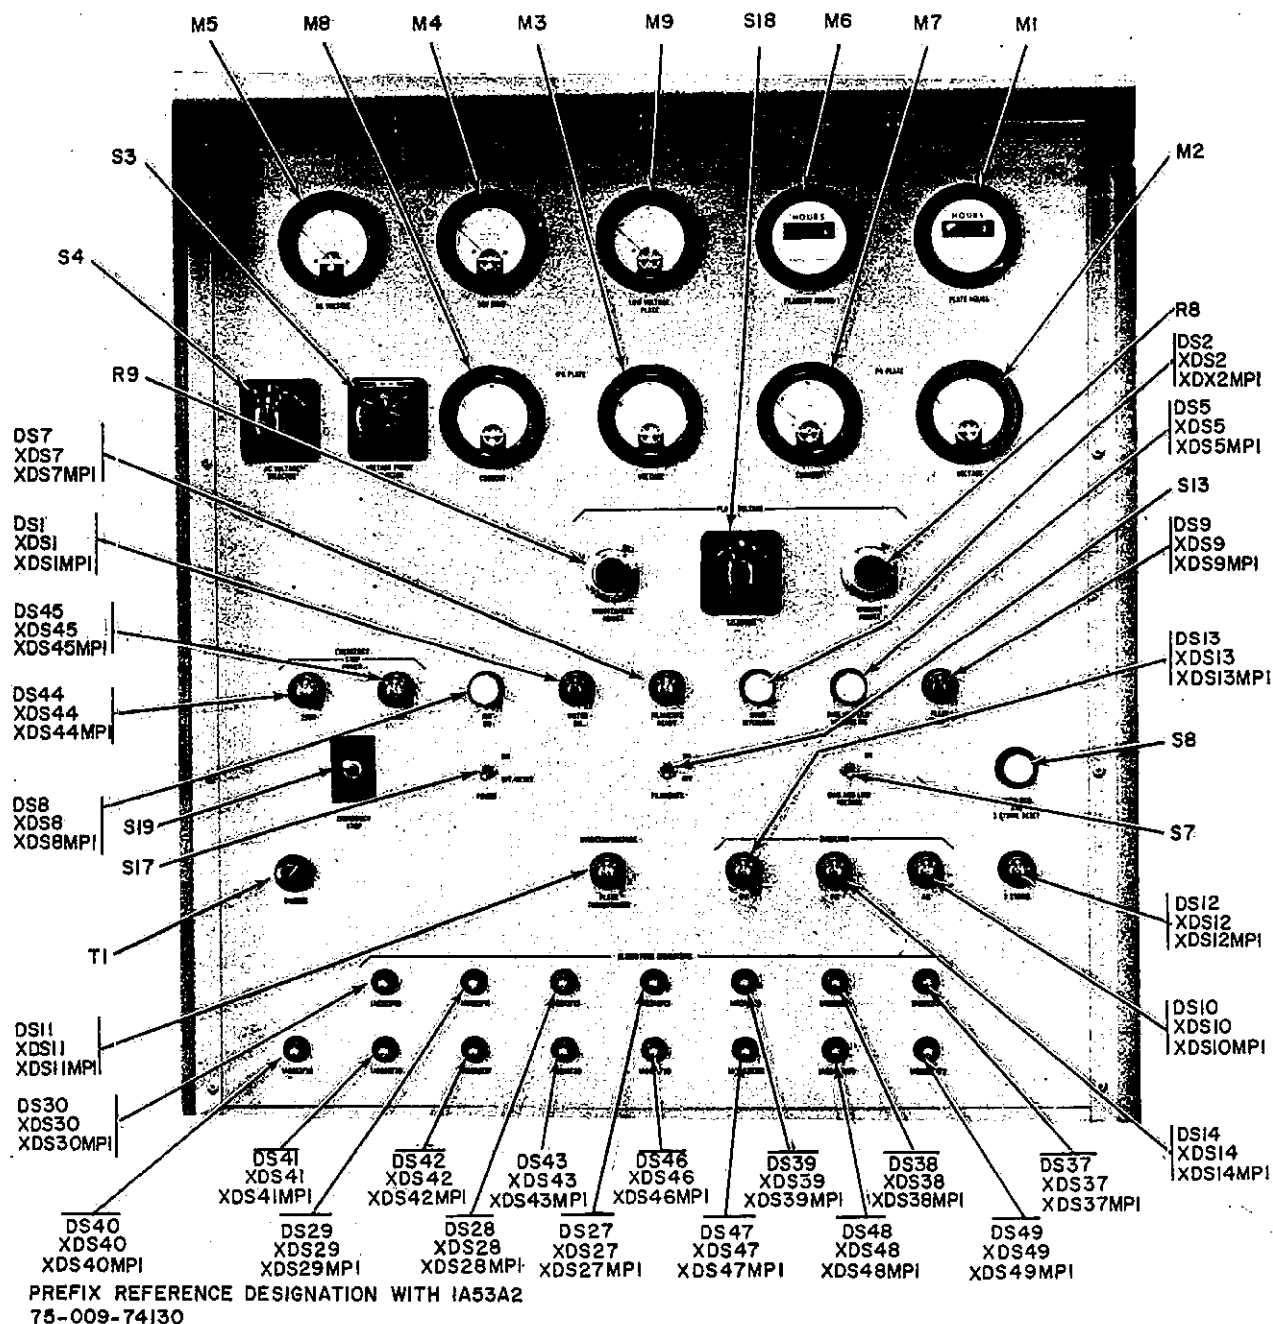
Control-Indicator C-10034/FPN-44A, Front View, Parts Location Diagram
